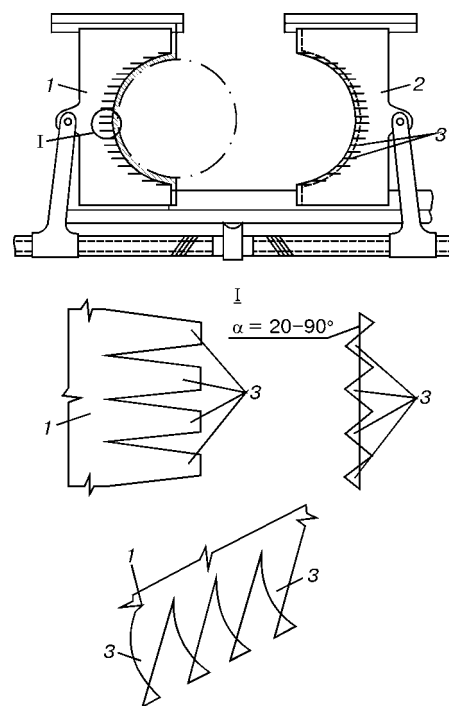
Schematic of device for butt welding of thermoplastic tubes (see designations in the text)
